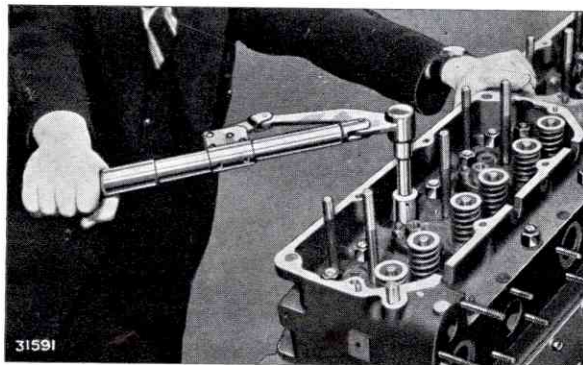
TIGHTENING CYLINDER HEAD NUTS USING A TORSION SPANNER
